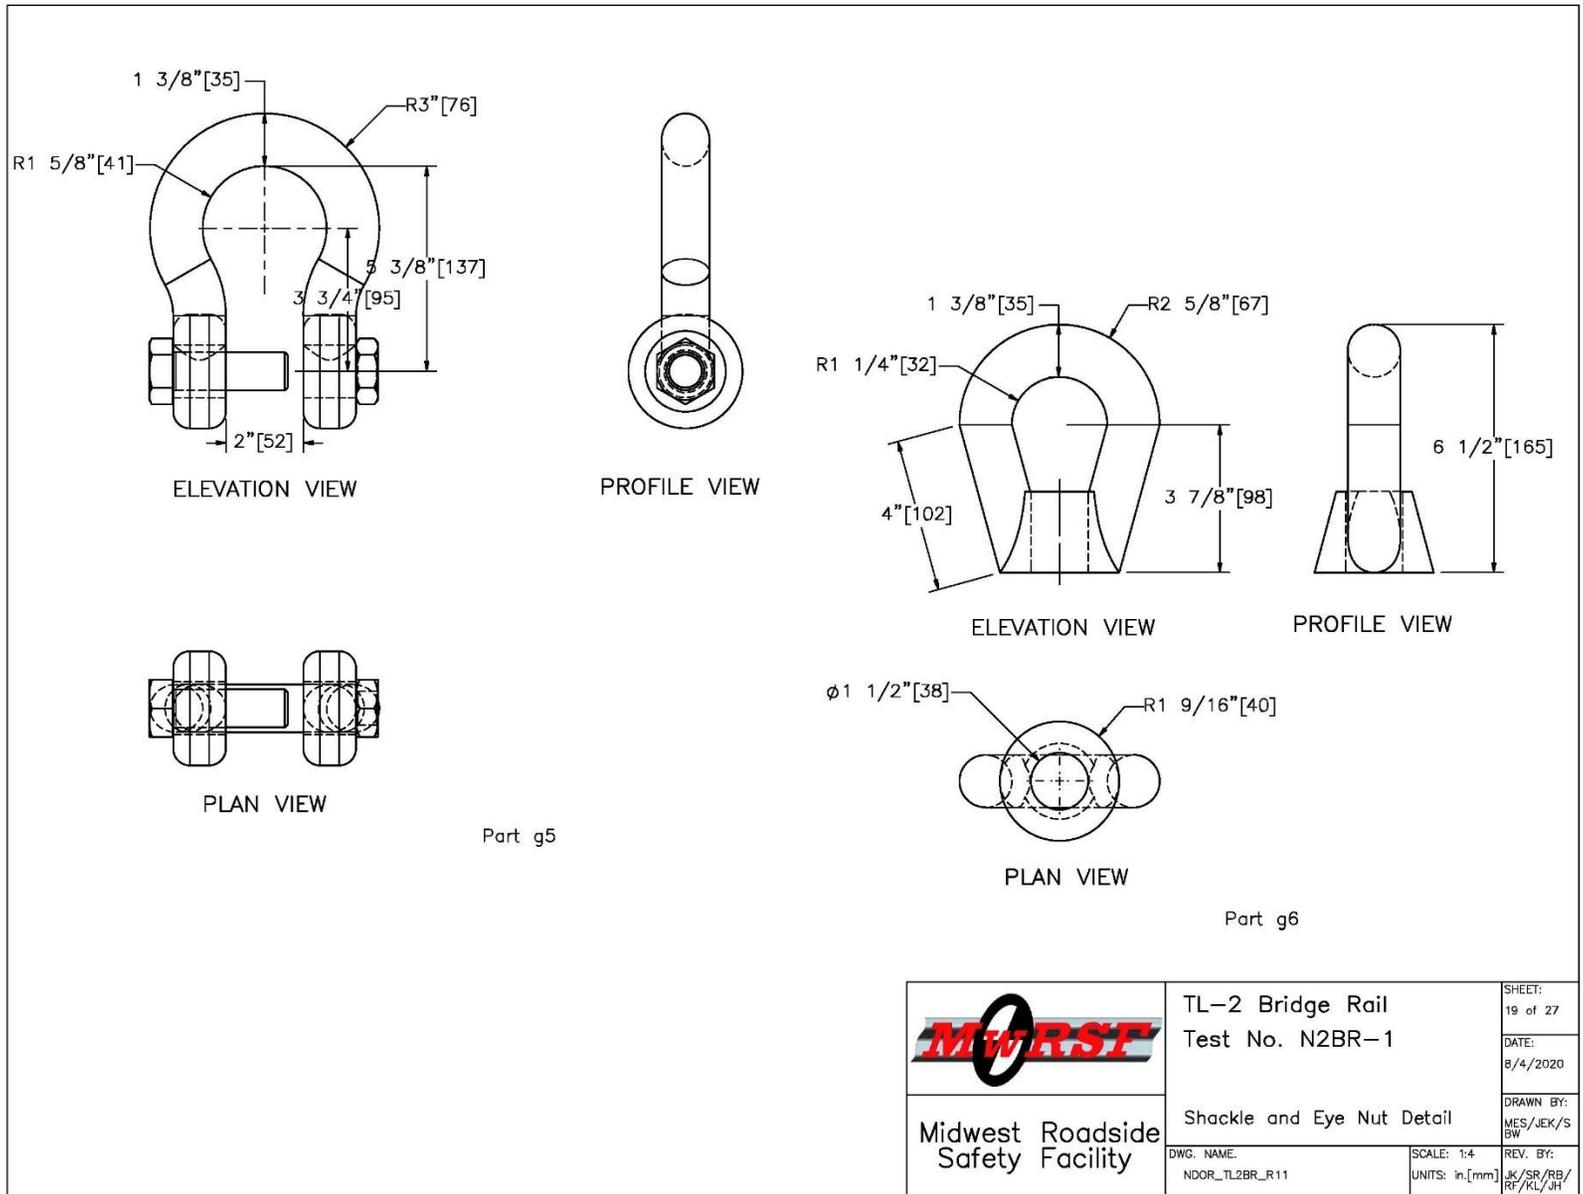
Shackle and Eye Nut Detail, Test No. N2BR-1
